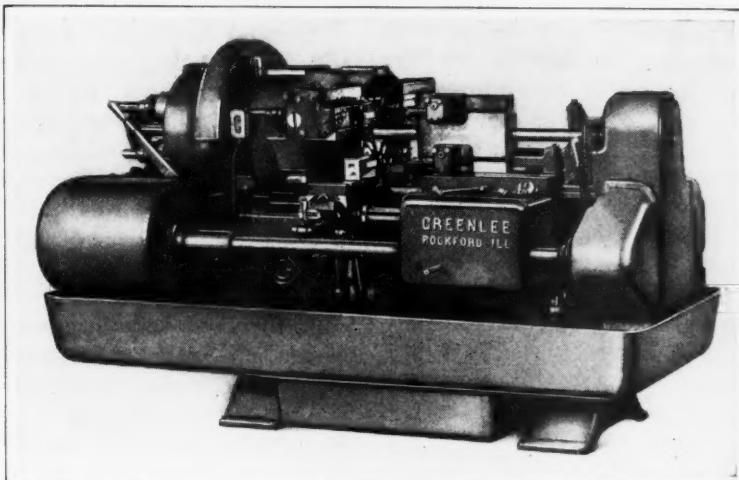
Greenlee Motor-driven Four-spindle Automatic Screw Machine
